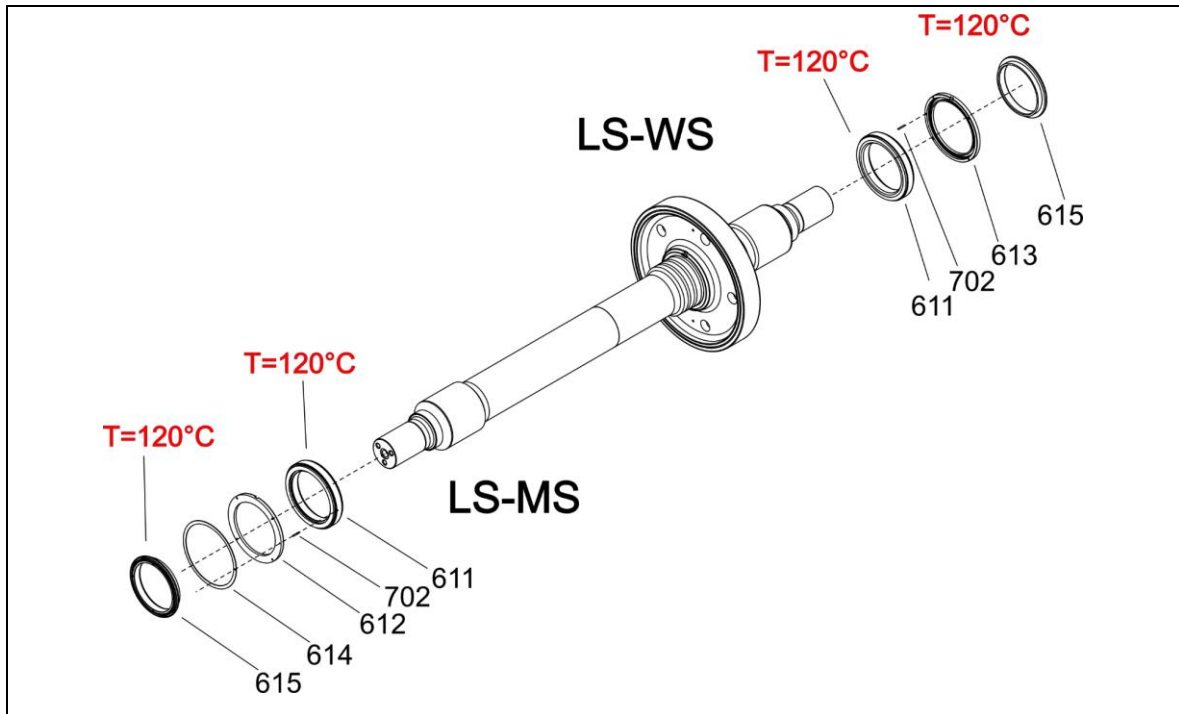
Removing the wheelset shaft from the Traction Gearbox
